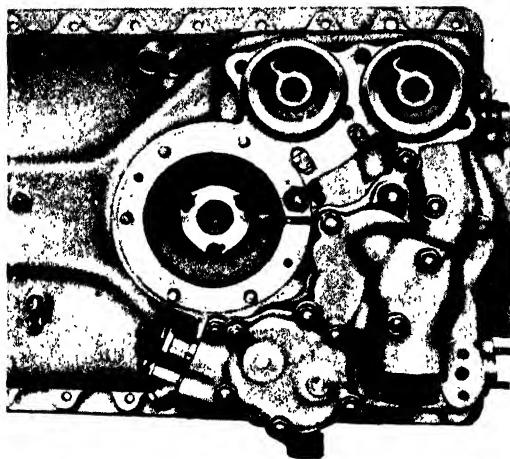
Inverted view of Crankcase Lower Half, showing Oil Pumps, Suction Filters, and Facing and Drive for R.A.E. Compressor.
